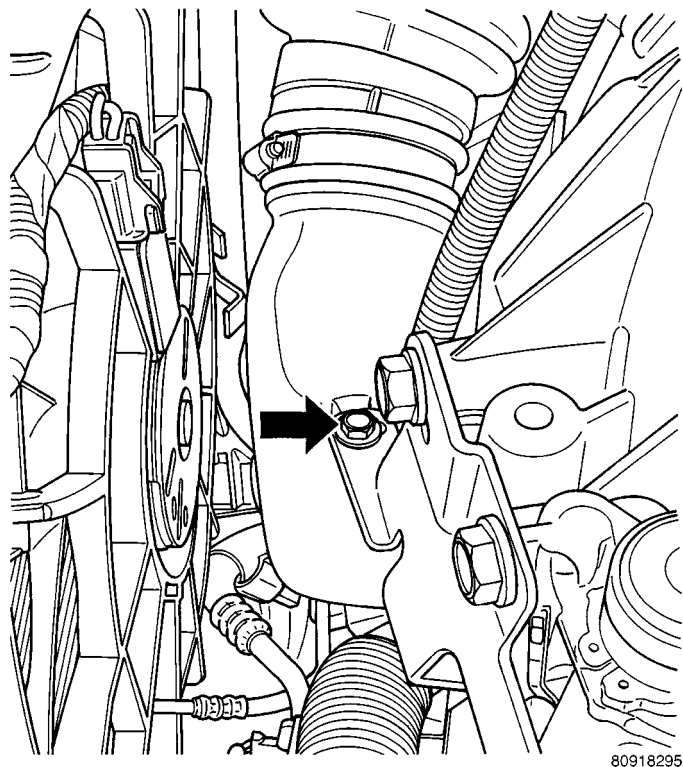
Lower Manifold Support Bolt - (Under-body View)
